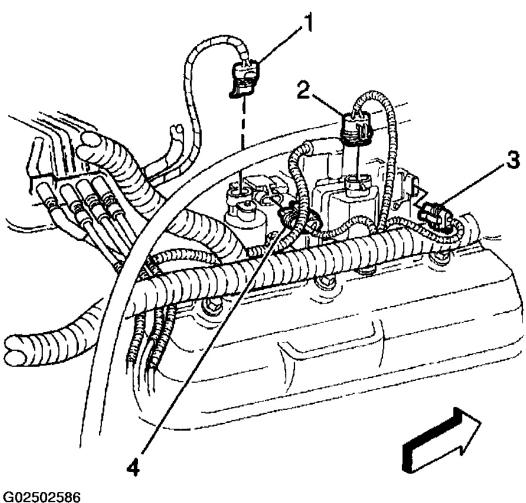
Connecting Manifold Absolute Pressure Sensor & EVAP Canister Purge Solenoid Valve Connectors
